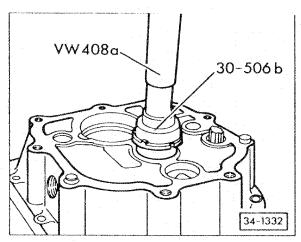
Pinion needle bearing in gear carrier housing, installing
